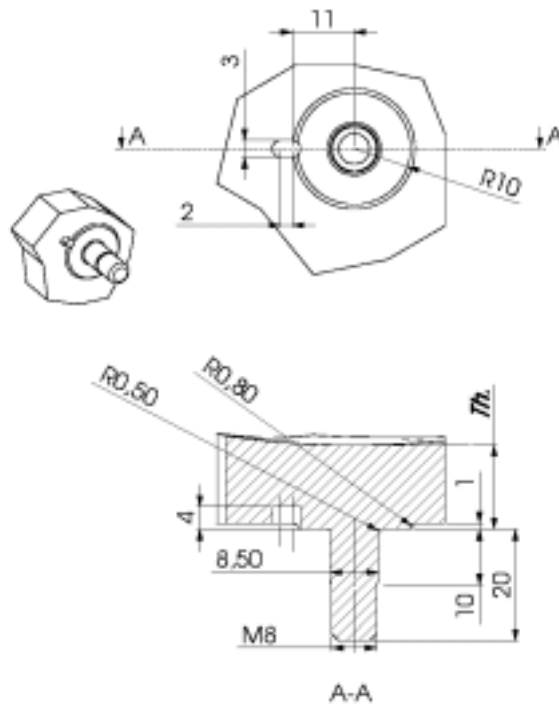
Drawing of the Mirror/Mirror Mount mechanical interface.
